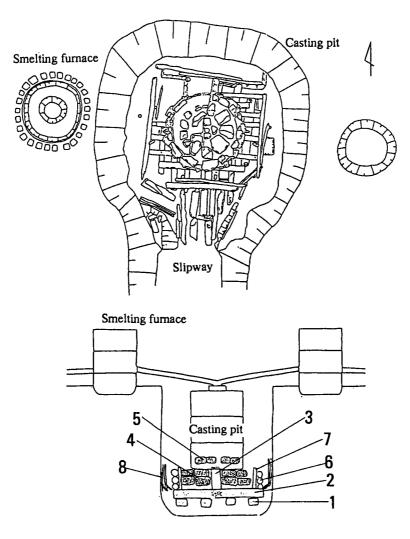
Ordination Hall site casting pit. Top: plan. Bottom: schematic section. From NAKAI 1991, p. 4. No scale provided in original.
